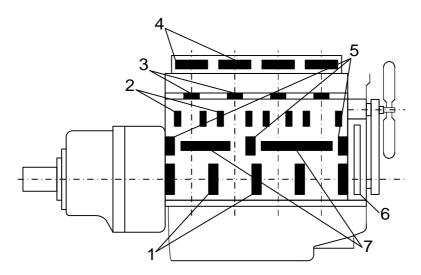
Places of listening knocking in the engine connections: 1 – crankshaft; 2 –bushing – pusher; 3 –valve–piston crown; 4 -rocker shaft- valve stem; 5 -camshaft bearing; 6 – distribution gears; 7 – camshaft cam – pusher.
